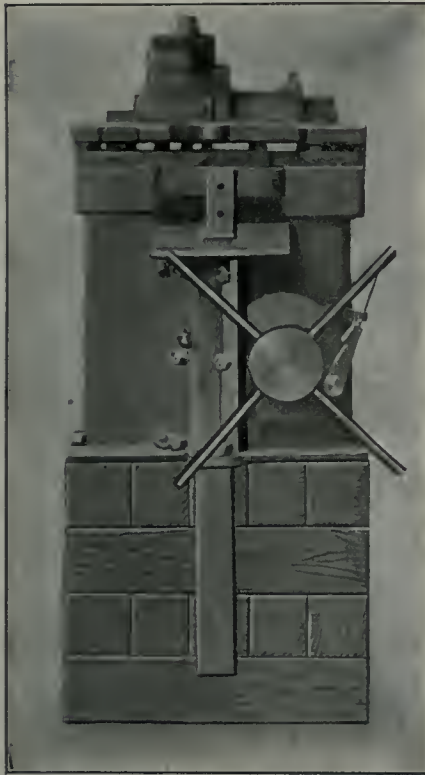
SIDE VIEW OF COMBINATION JAR AND STRIPPING PLATE MACHINE.
